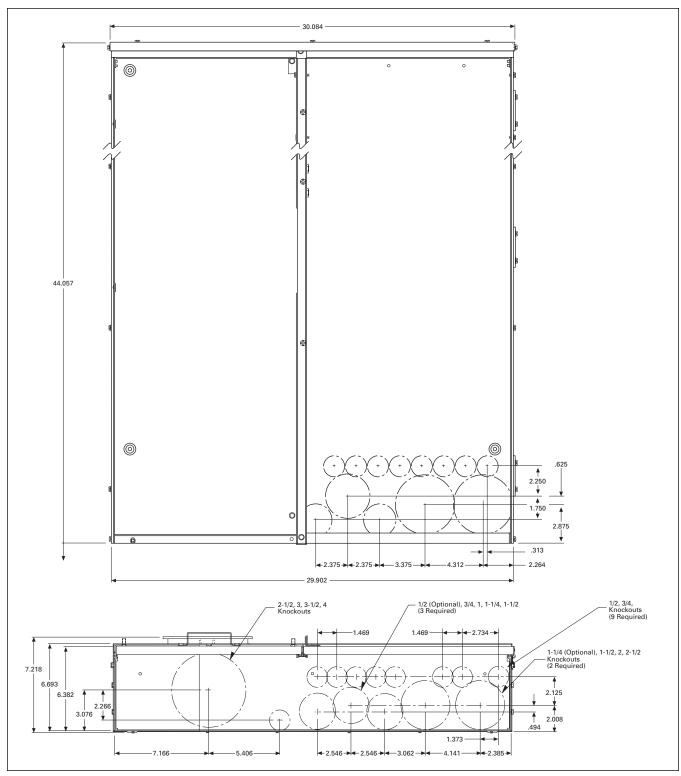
Type BR Meter Breaker Dimension Drawing 1
